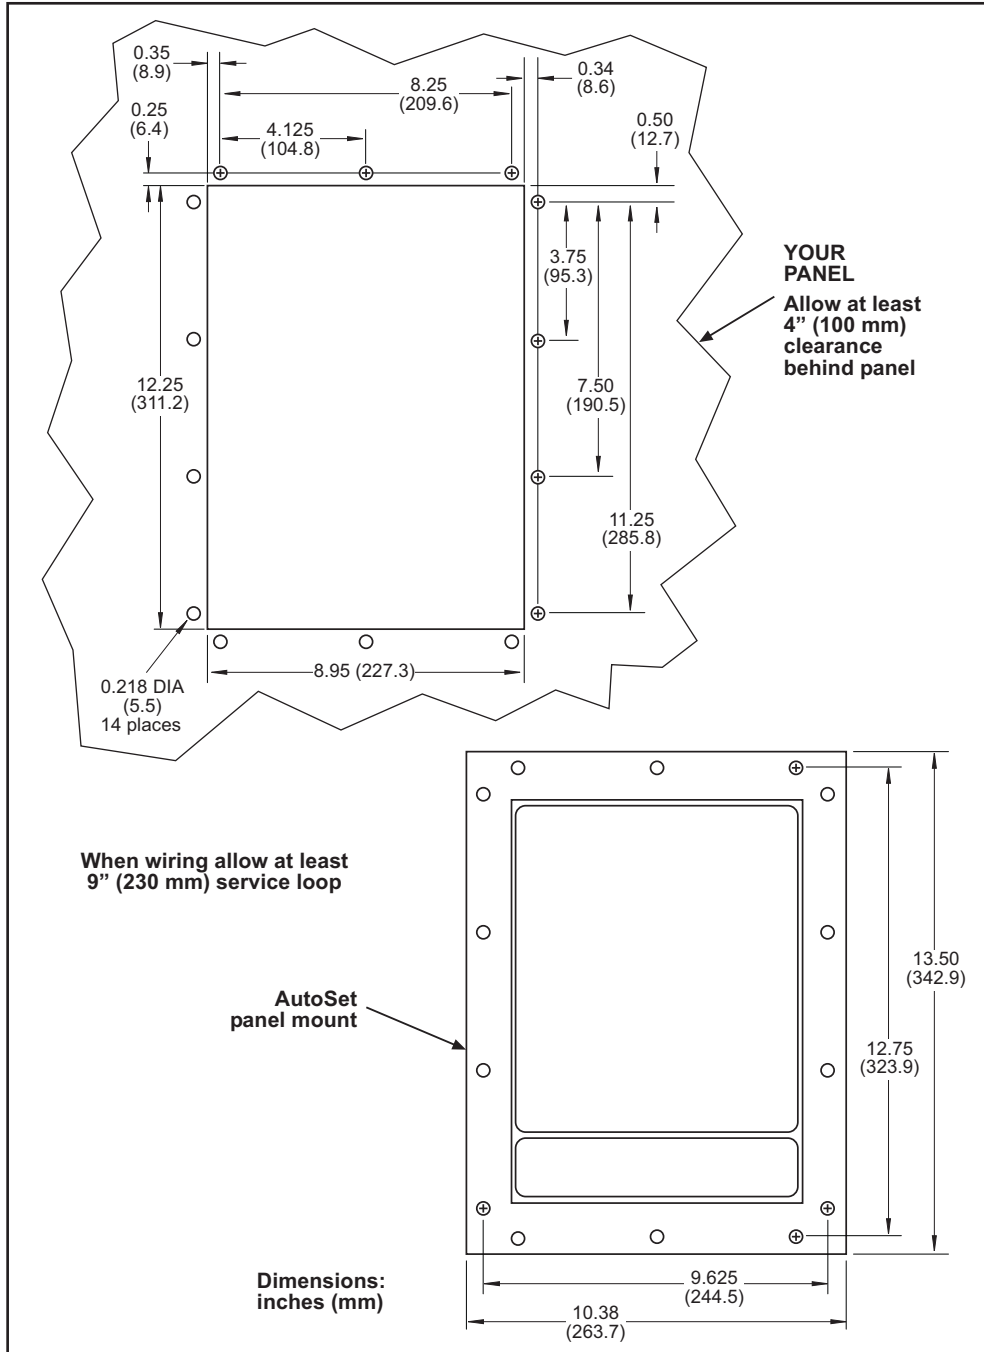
AutoSet Panel Mount: Mounting and Cutout Dimensions
